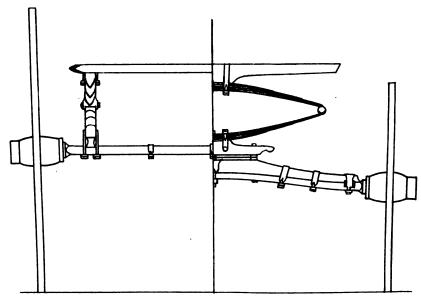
SHOWING HALF BACK ELEVATION OF BUNNING GEAR.
